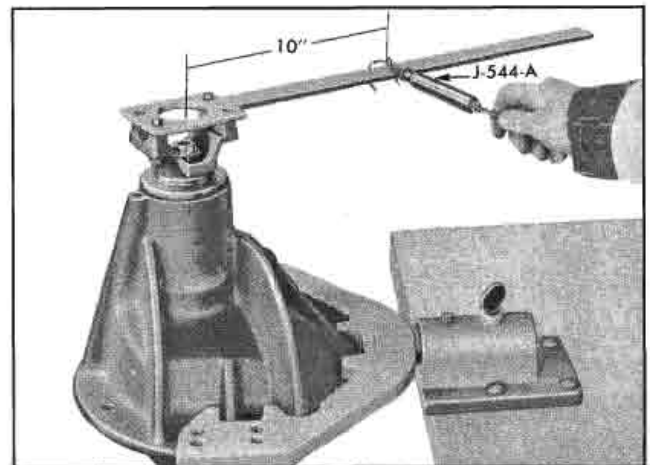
Checking Pinion Bearing Preload with J-544-A
